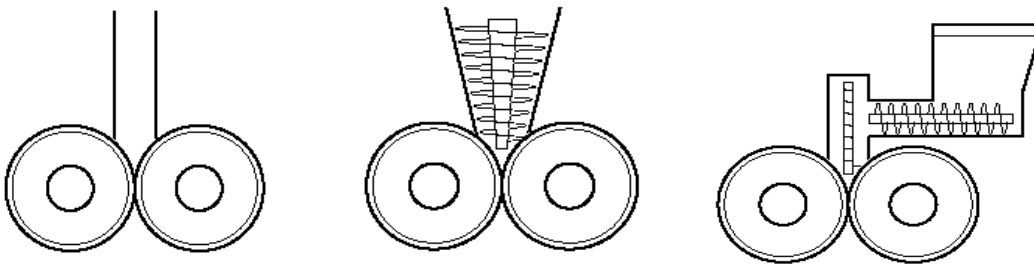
Different feeding system: a) gravity feeder, b) single screw feeder, c) double screw feeder¹⁶
